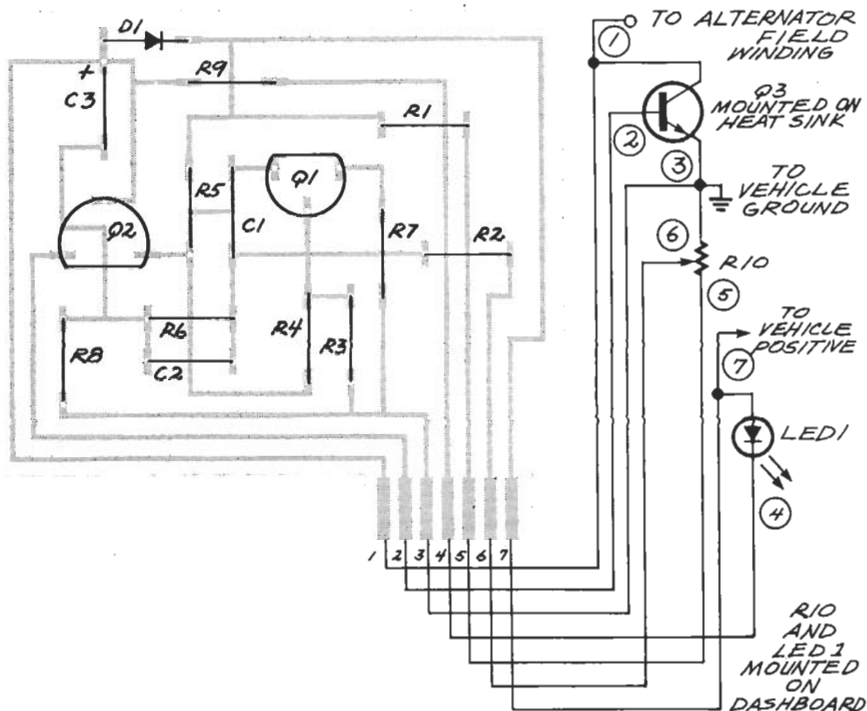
PARTS-PLACEMENT DIAGRAM. Remember that Q3 should be mounted off the board on a heatsink and R10 and LED1 can be mounted on your dashboard.
